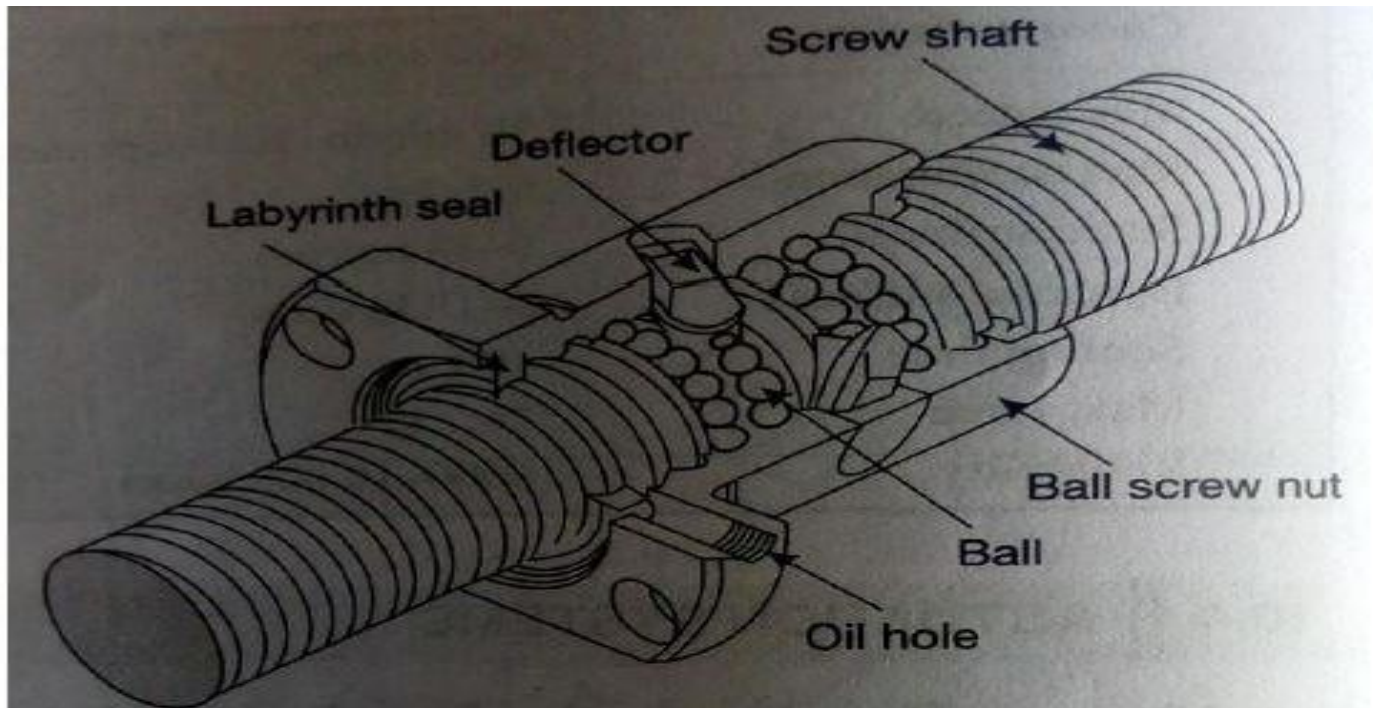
A recirculating ball screw and nut arrangement (Courtesy, THK Co. Ltd., Japan)
